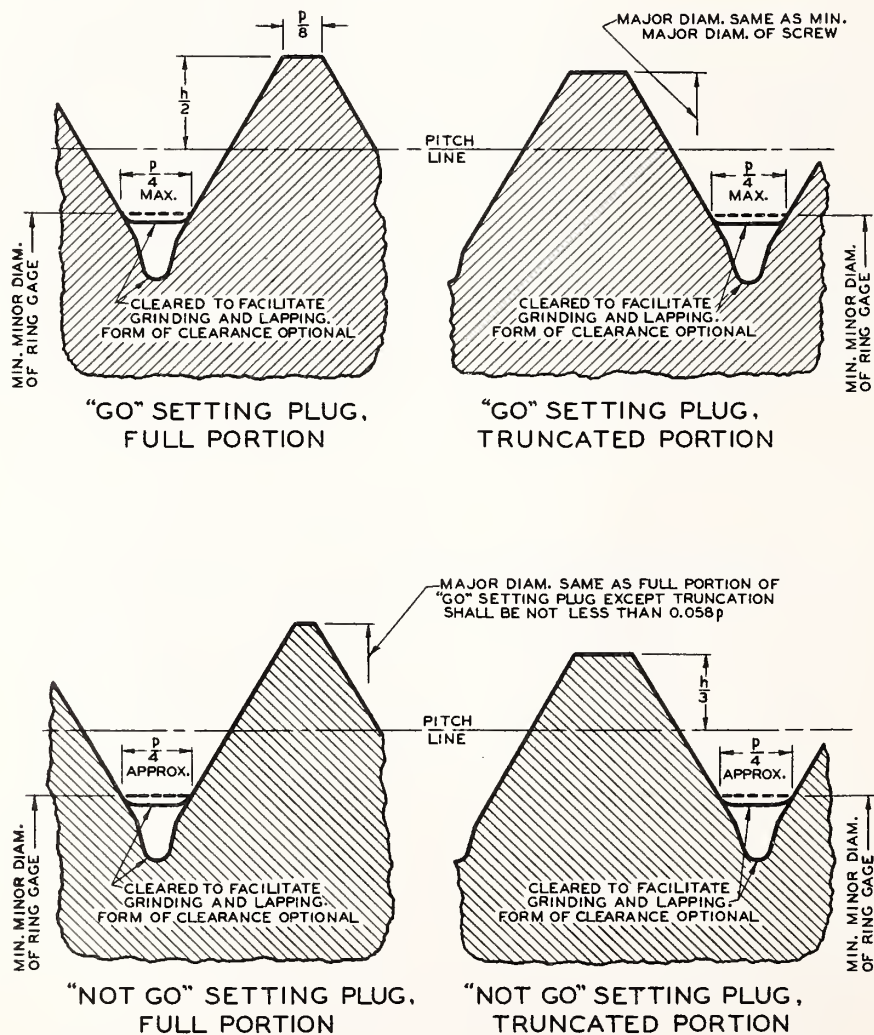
Thread form of "go" and "not go" thread setting plug gages.
